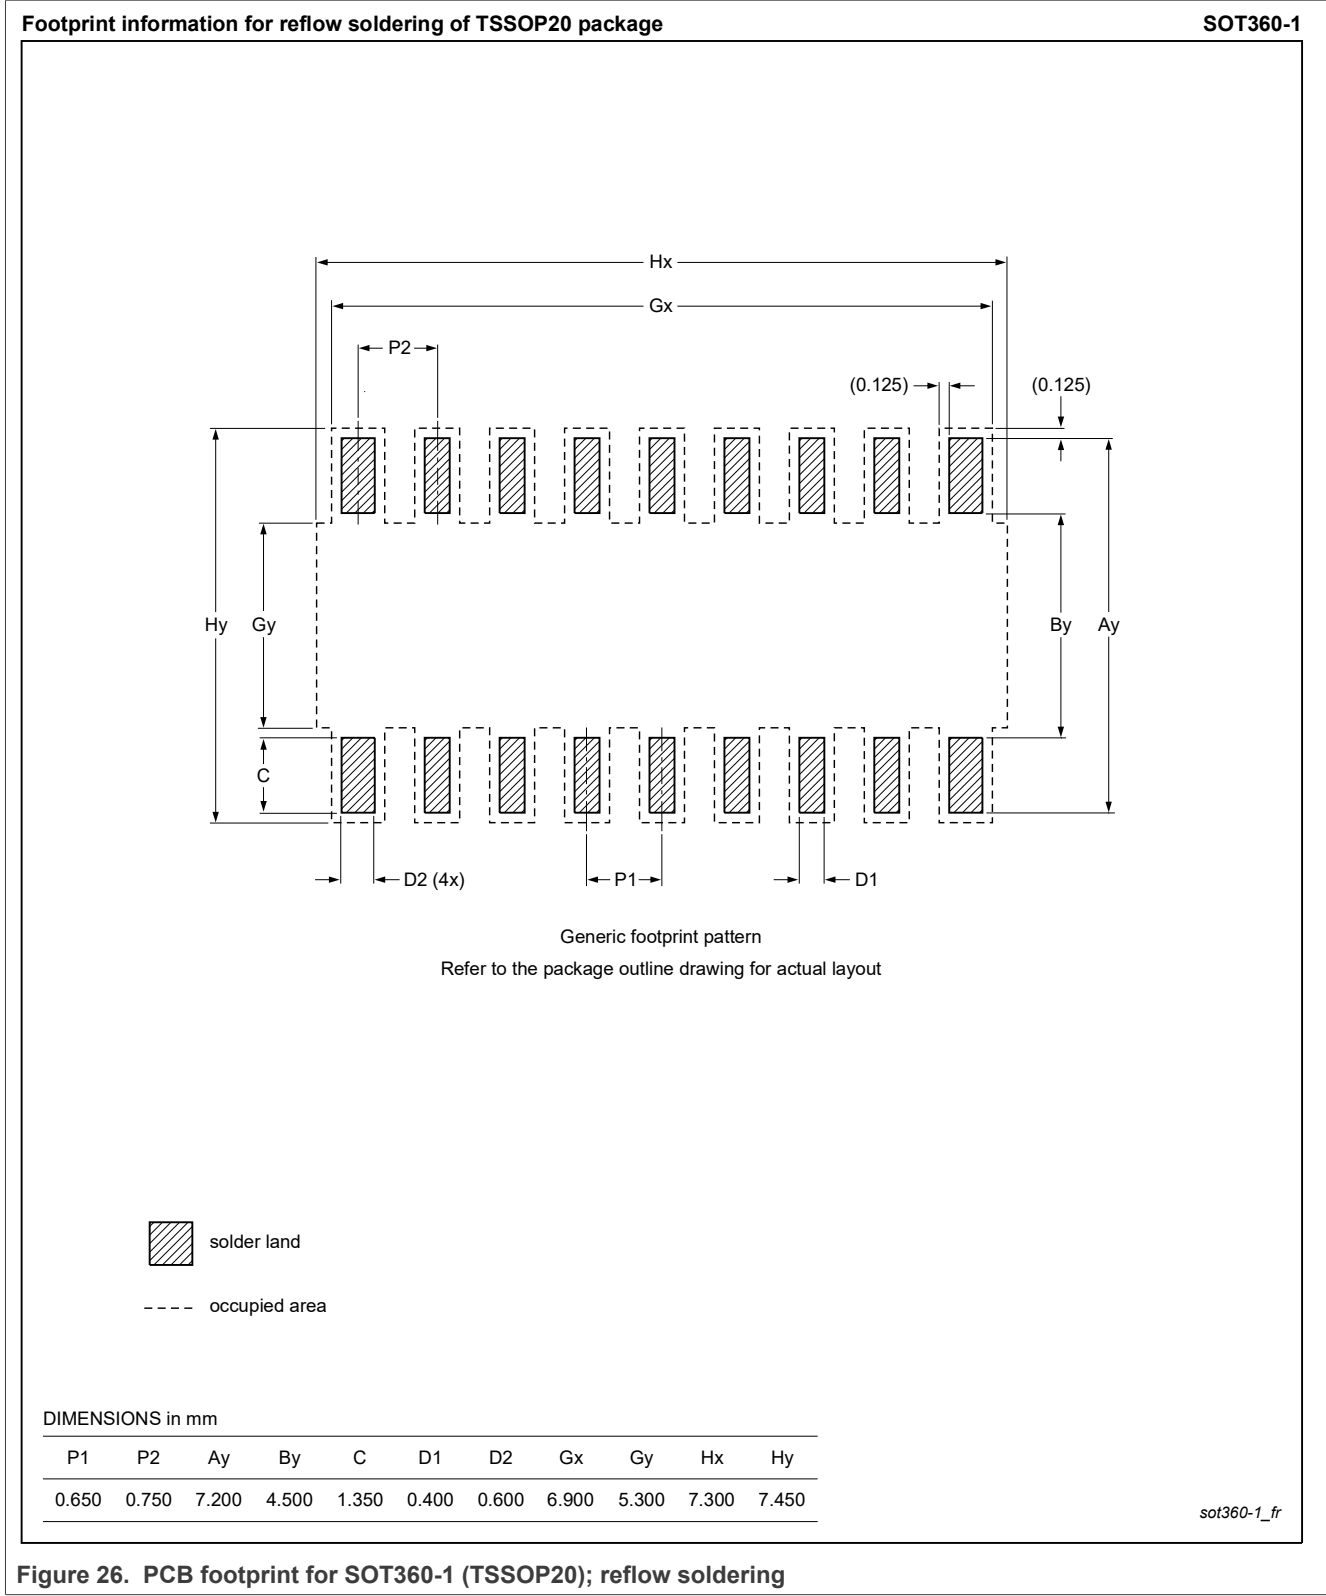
PCB footprint for SOT360-1 (TSSOP20); reflow soldering
